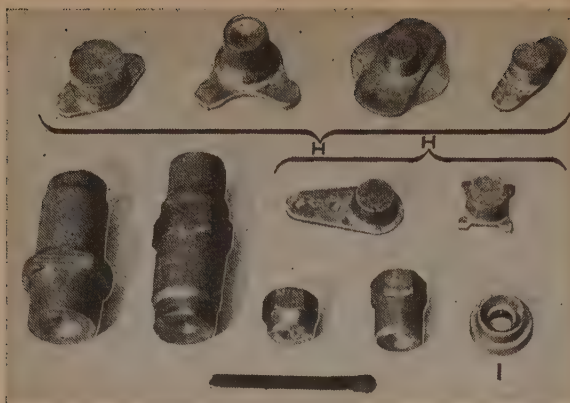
Functioning as a three-blow machine, a double-blow cold header was used in making these parts. The technique of using two-blow machines for three-blow operations is described in the text.
